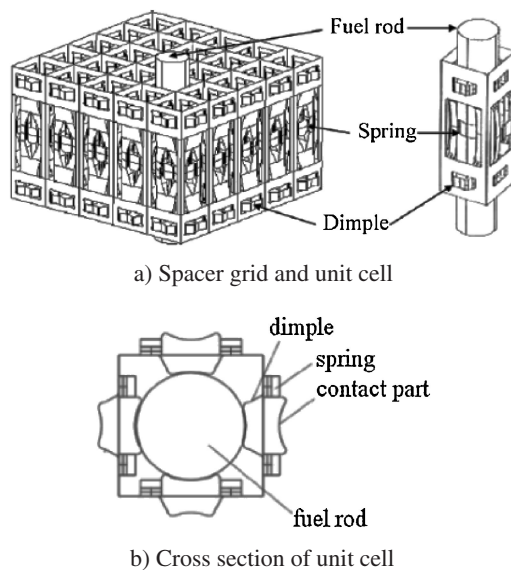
Spacer grid and cross section of spacer grid unit cell
